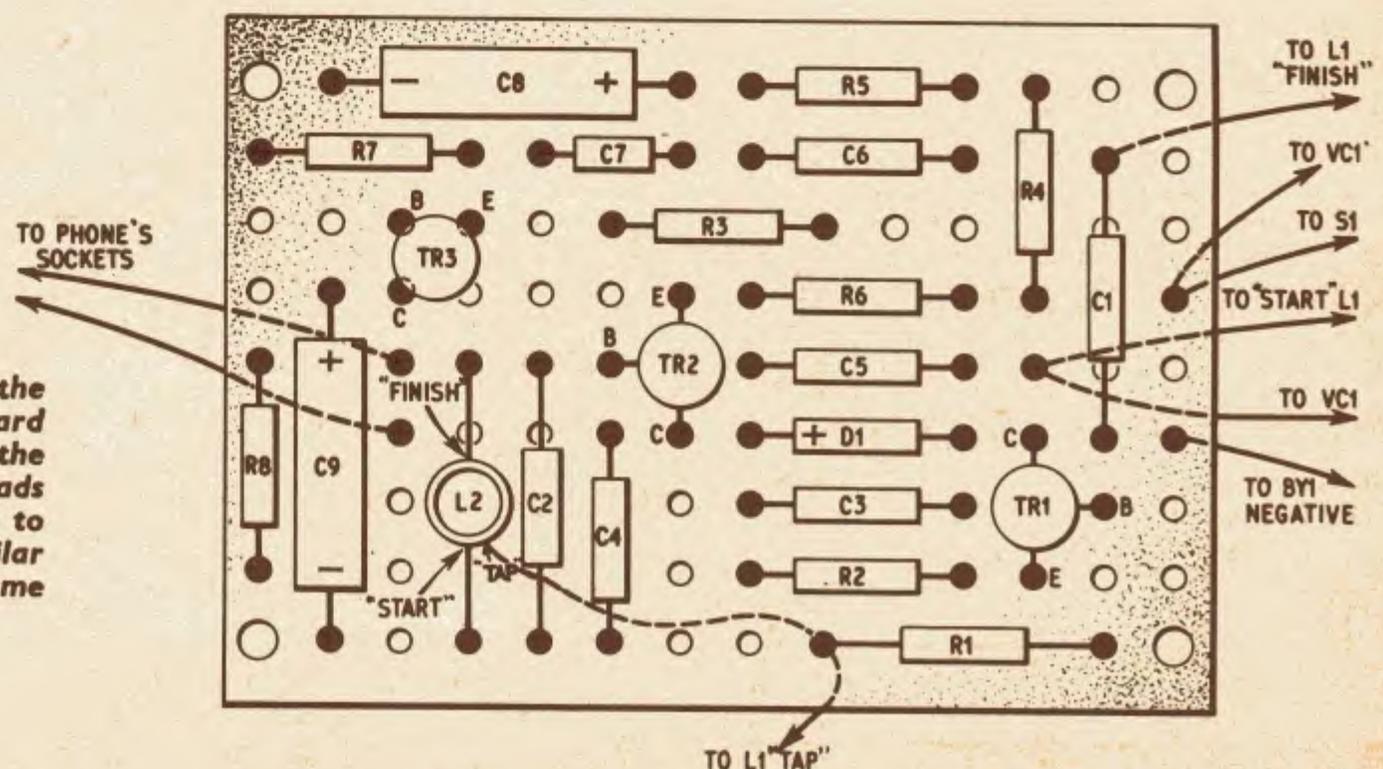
Topside view of the main component assembly board showing the positions of the components. Notice that leads are taken from this board to VC1 (mounted on a similar board) and L1 which is the frame winding (see text)
